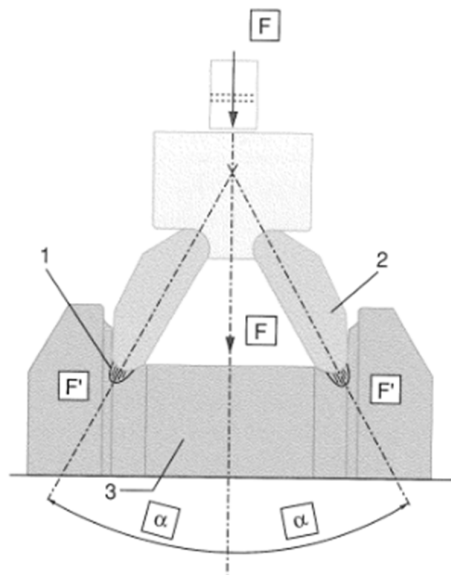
Characteristics of deep rolling: 1) Compressive stress in fillet, 2) Rollers 3) Workpiece [45].
